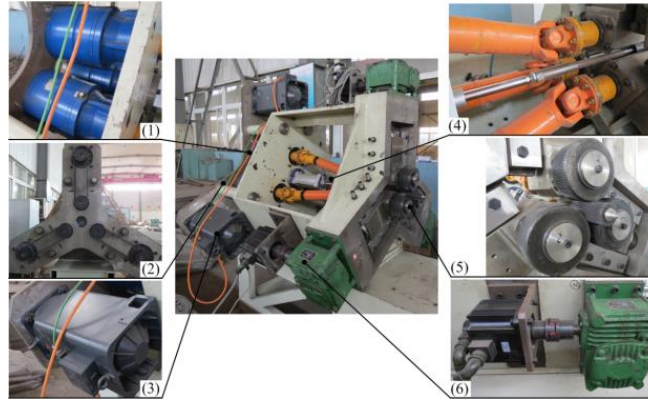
The axial-infeed incremental rolling equipment: (1) Planetary reducer, (2) Synchronous Belt Transmission, (3) Main AC servo motor, (4) Universal coupling, (5) Rolling position and (6) Diameter control AC servo motor and worm gear reducer
